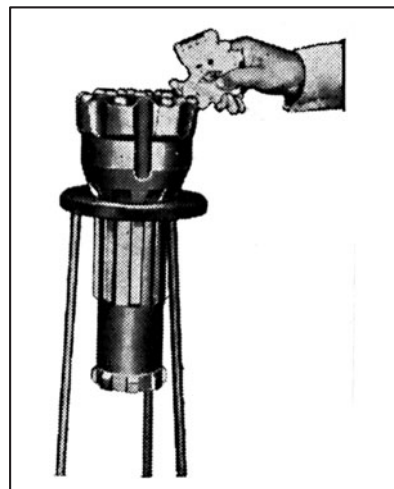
Checking the hemispherical shape of the gauge button of a DTH button bit with a bit gauge. Note that the hammer bit is held in a stand for regrinding
